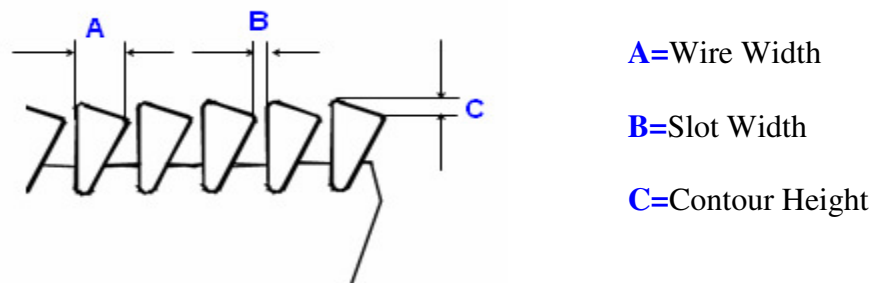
Typical Inner Surface Wedge Wire Design [14]
